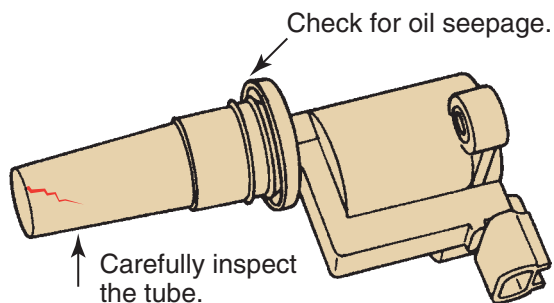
The plastic assembly for COP assembly should be carefully inspected.
